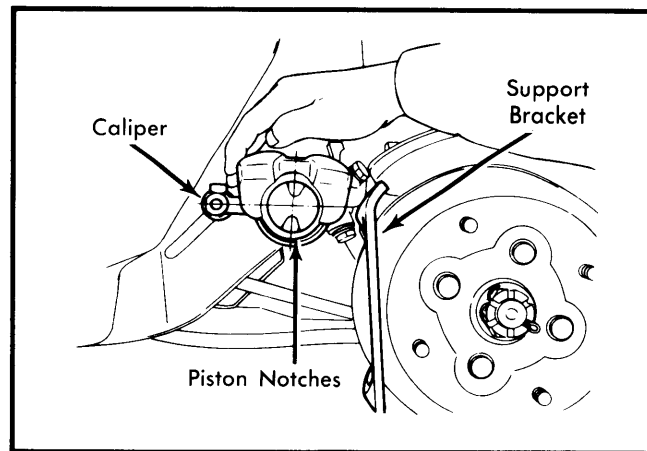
Aligning Caliper Piston Notches for Replacing Disc Brake Pads
